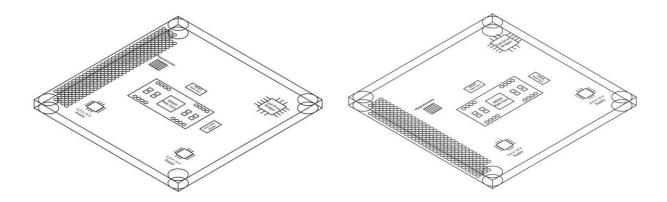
40 PRINTED CIRCUIT BOARD (PCB)-1
